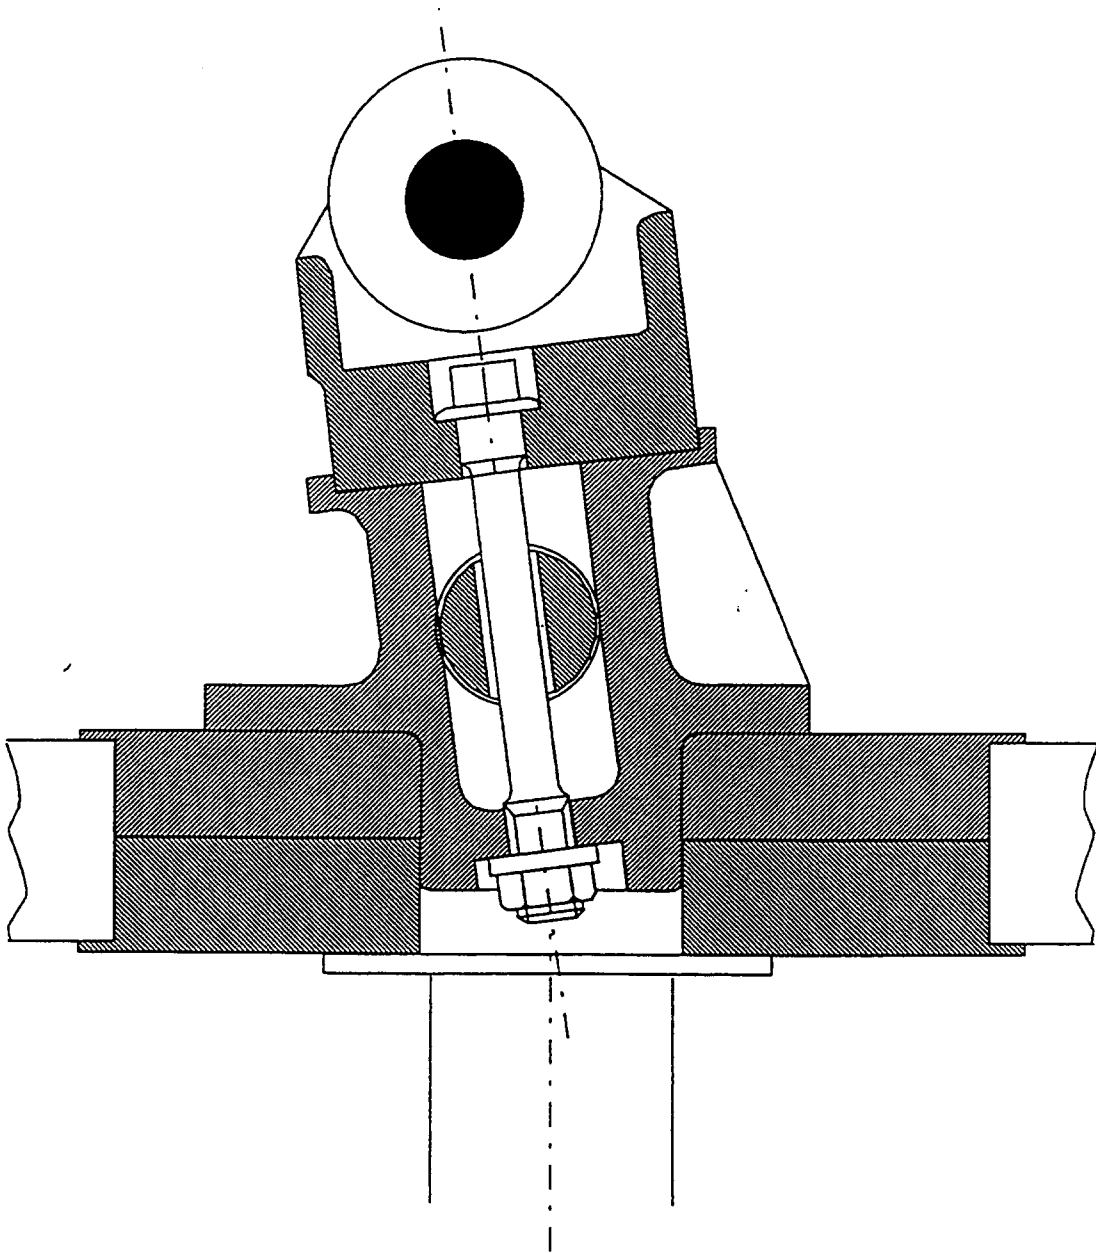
PJM ASSEMBLY
